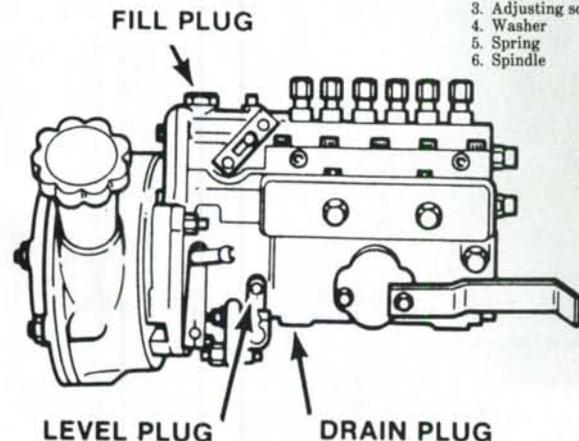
View showing location of filler plug, oil level plug and drain plug on inline injection pump used on six-cylinder engines.
